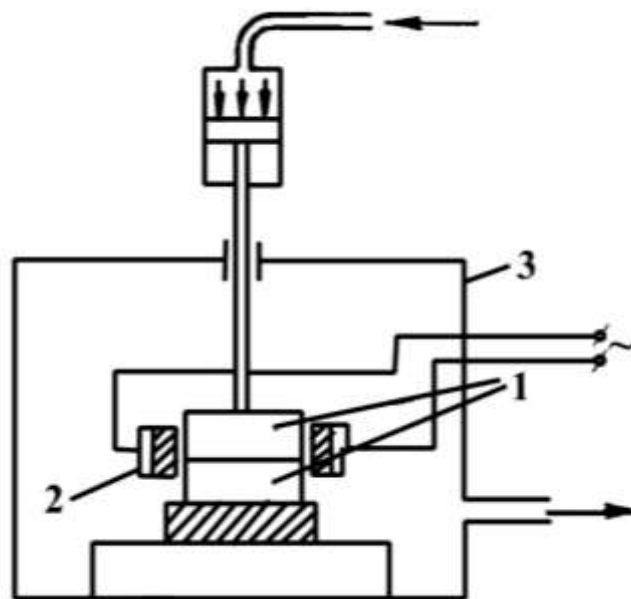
Diffusion welding: 1 – works to be welded; 2 – heater; 3 – vacuum chamber
